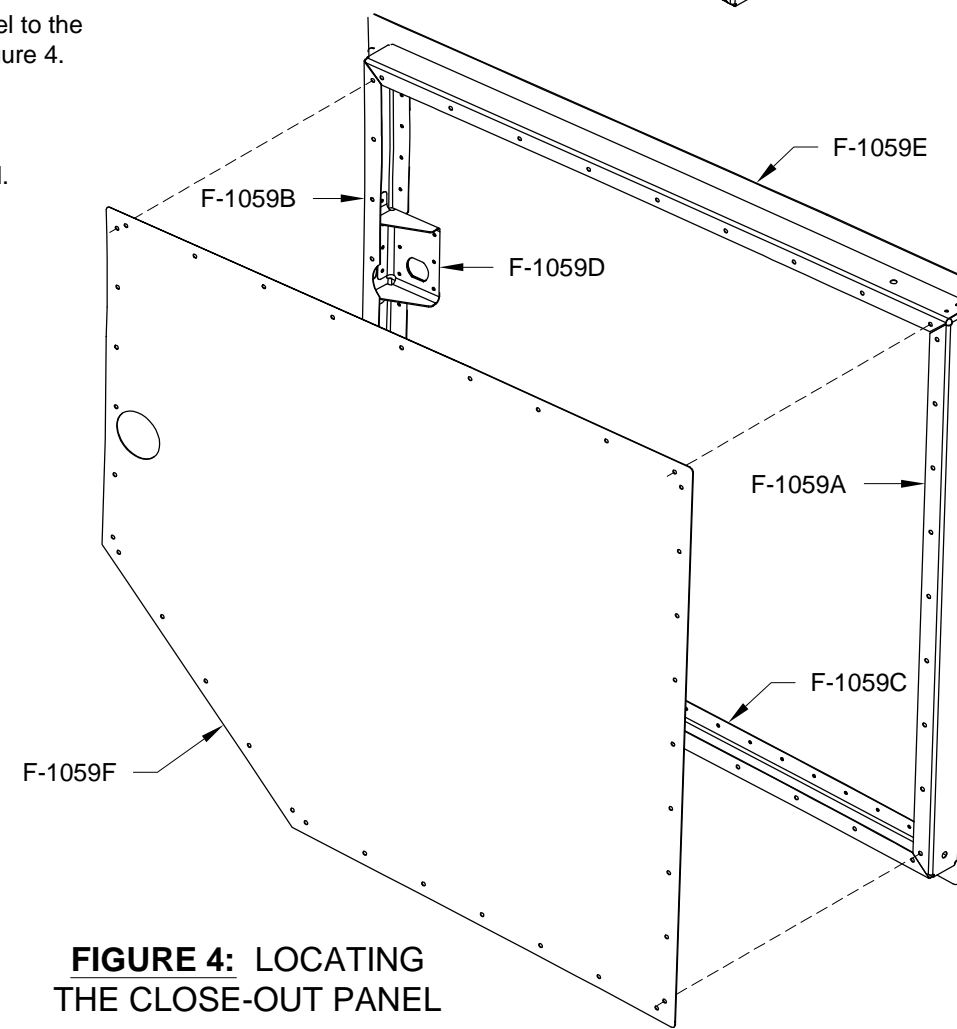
LOCATING THE CLOSE-OUT PANEL
